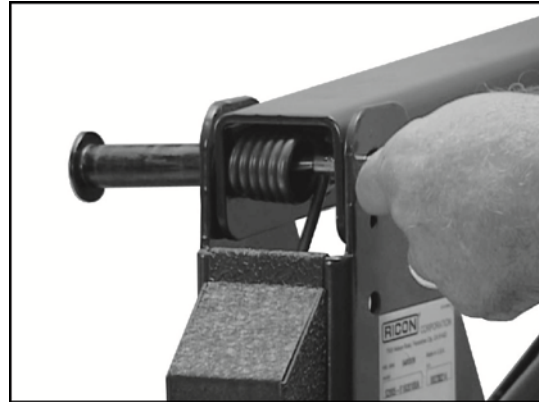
PIN WITH PIN ALIGNMENT TOOL
